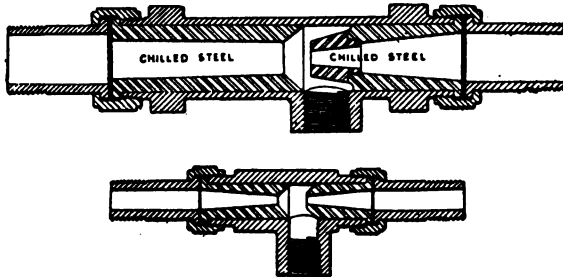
SECTION OF HYDRAULIC JET ELEVATOR.
